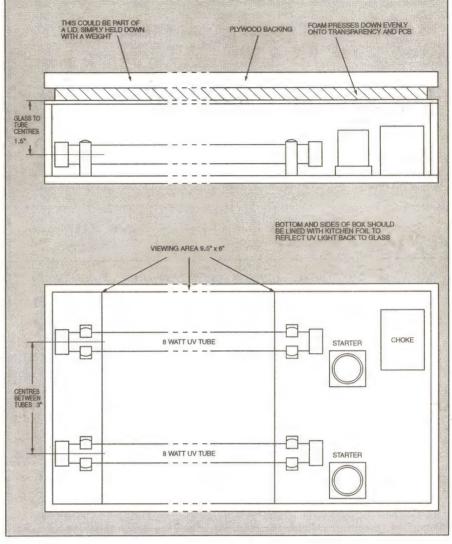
Dimensions and layout suggestion for a two-tube UV Lightbox.
